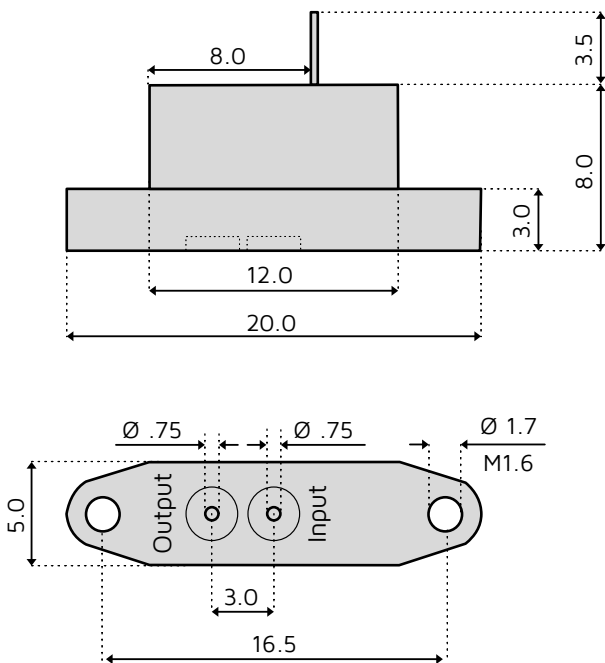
Dimensions of the NC miniature valve (height of 1.2 lower). All units in mm.
